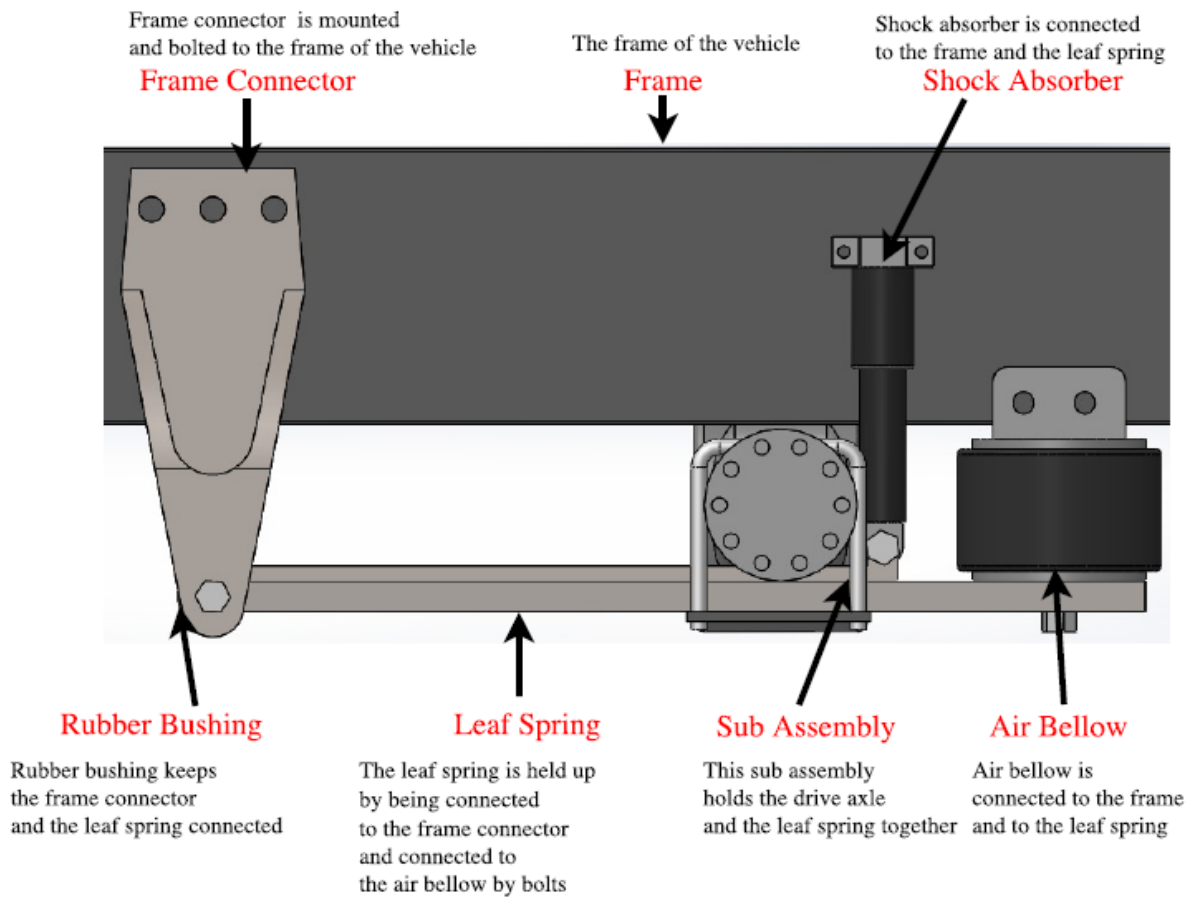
SYSTEM COMPONENTS SIDE VIEW
